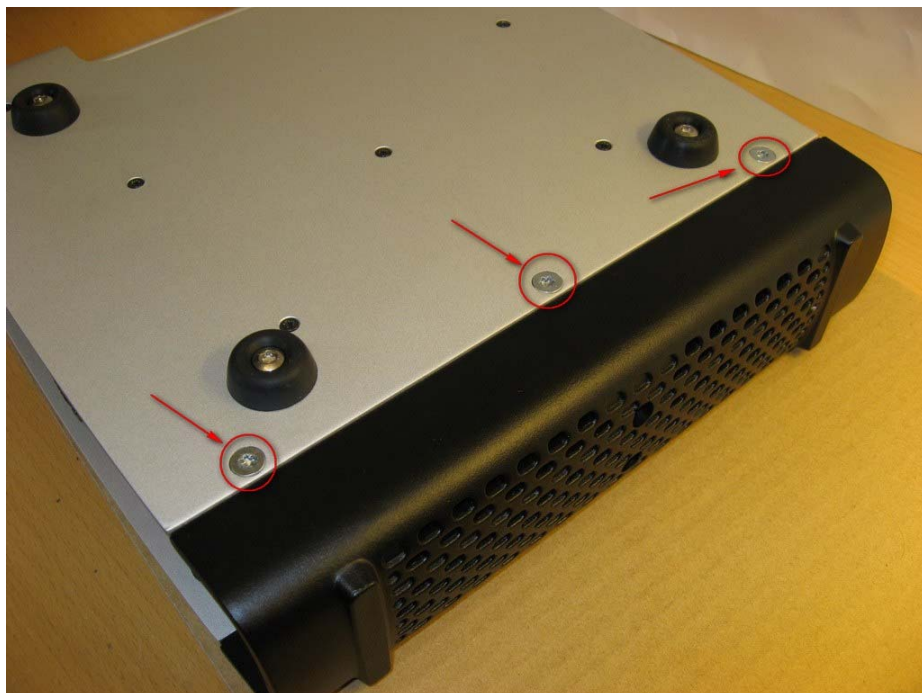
Mount the three screws as shown in the picture. (3 pcs. M5x7 torx black)
